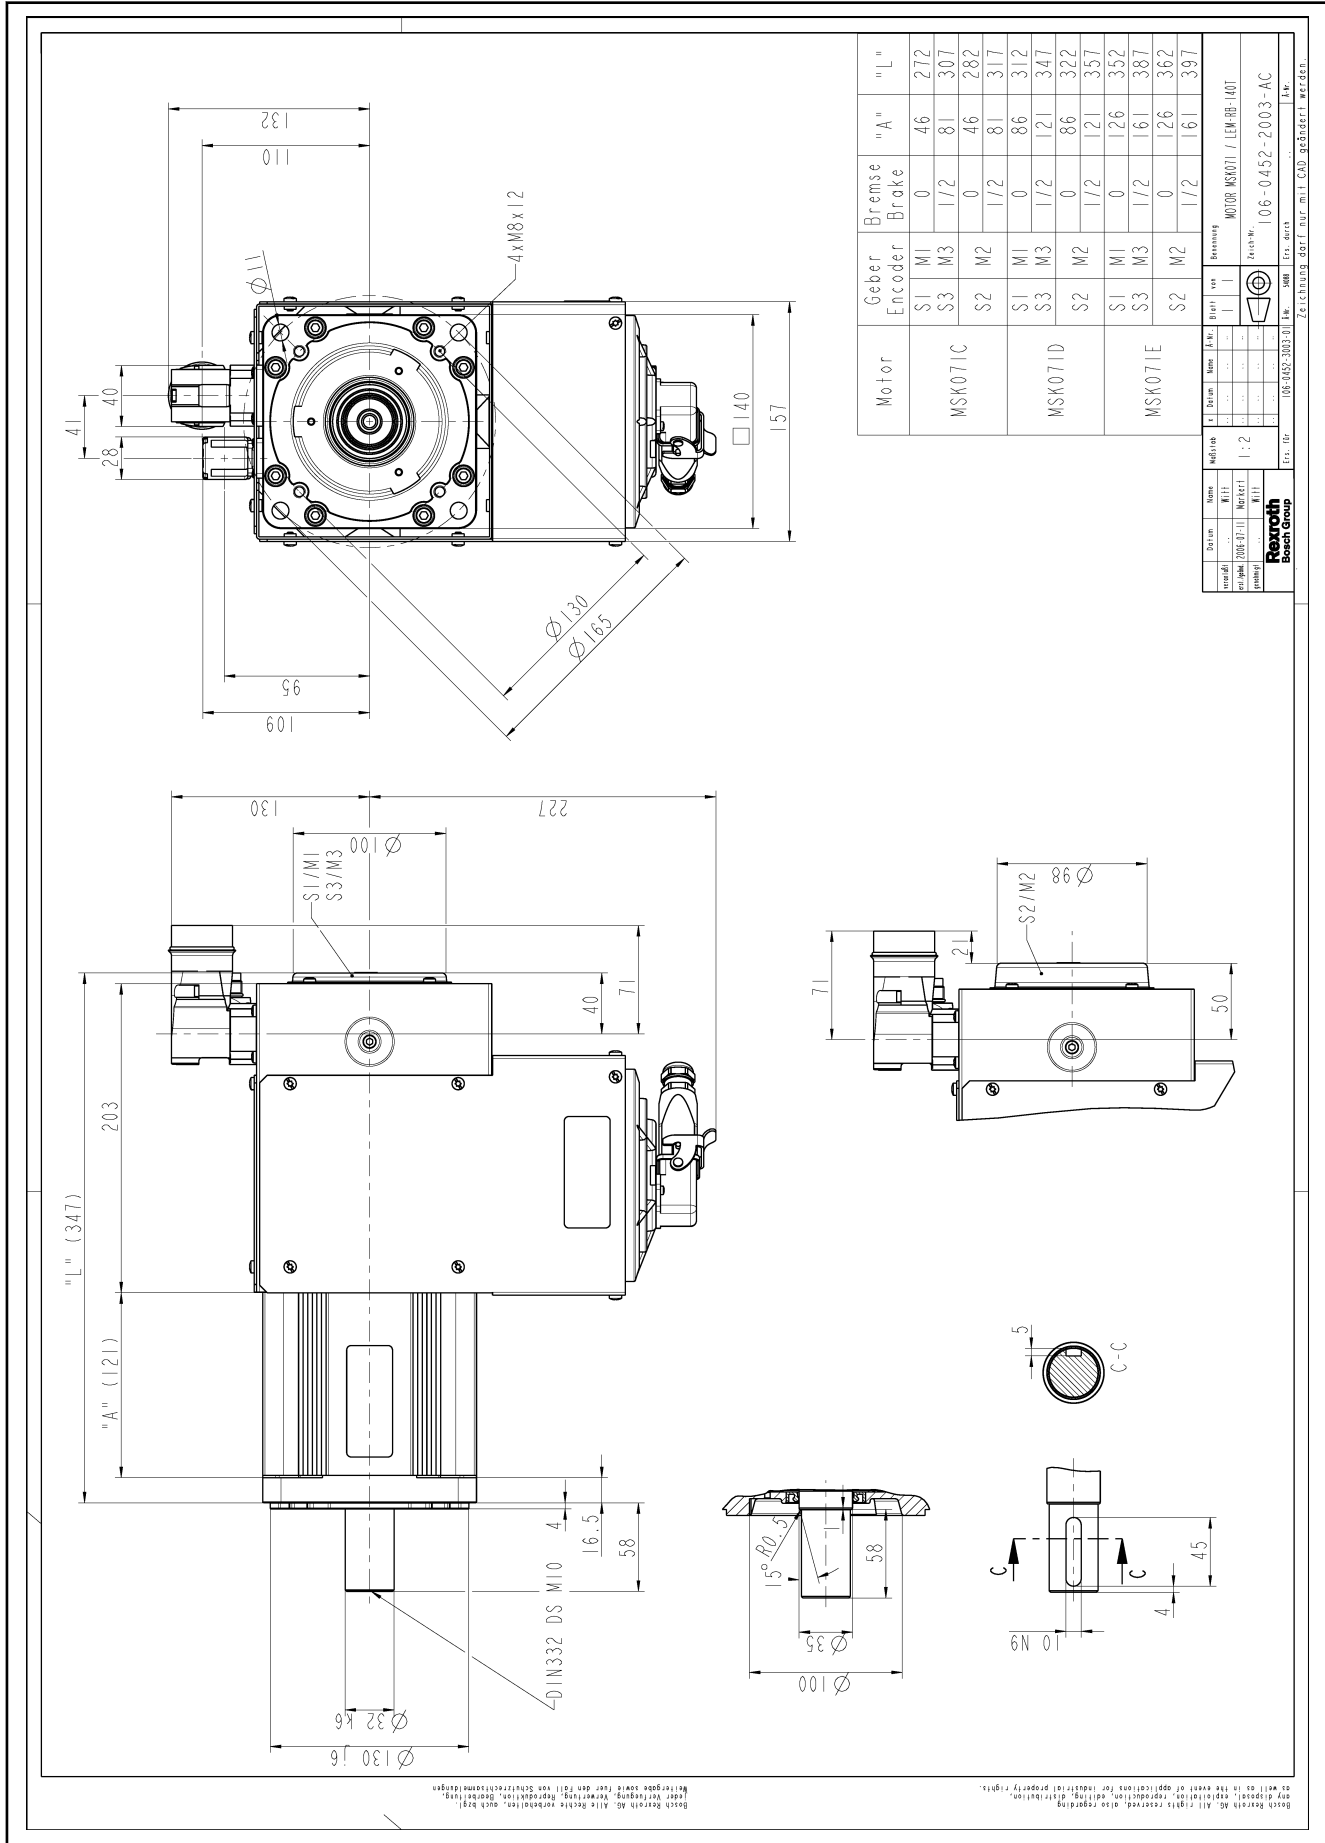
Dimension sheet MSK071 with radial fan unit
